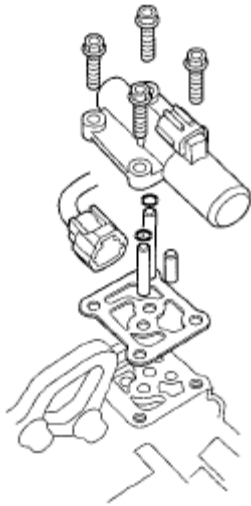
Identifying A/T Clutch Pressure Control Solenoid Valve Connector
